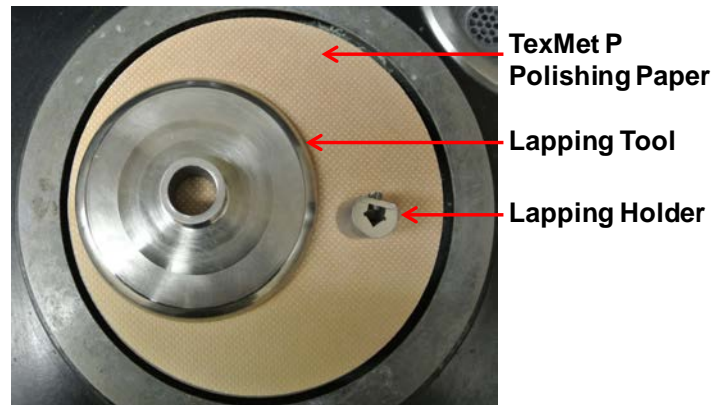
Twelve-in polishing wheel with TexMet P polishing paper, lapping tool, and lapping holder for the test specimen.
